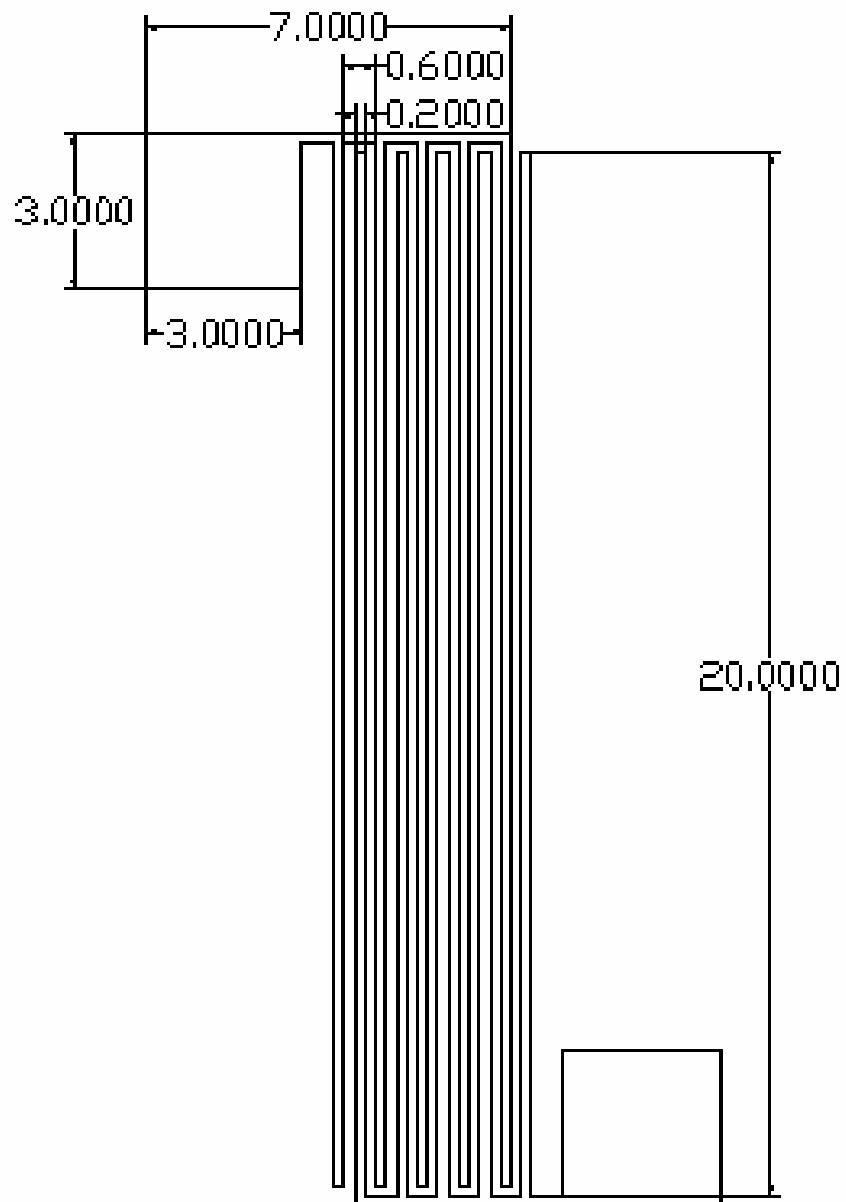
Dimensions of the aluminium electrode: Pattern drawn in mask 2
